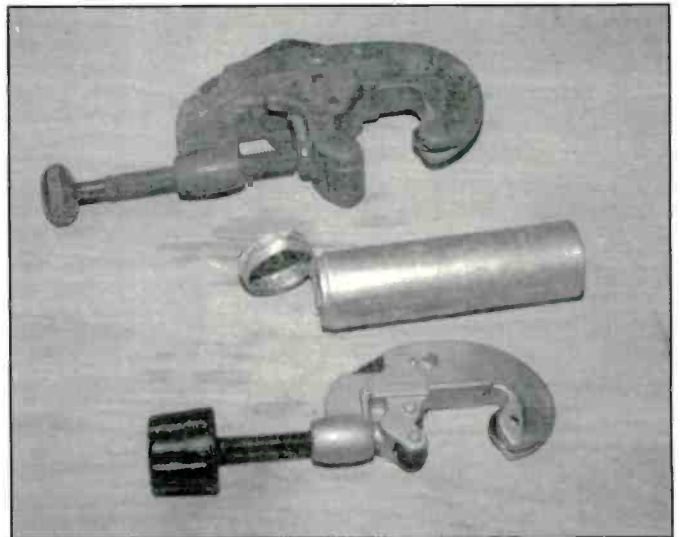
This wet electrolytic is carefully cut open using a sharp pipe cutter. The cut is placed over an existing ridgeline to hide the cut at reassembly.
